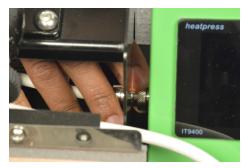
Disconnect the power cable FIG 2: Remove the screws or before removing the fitting.
